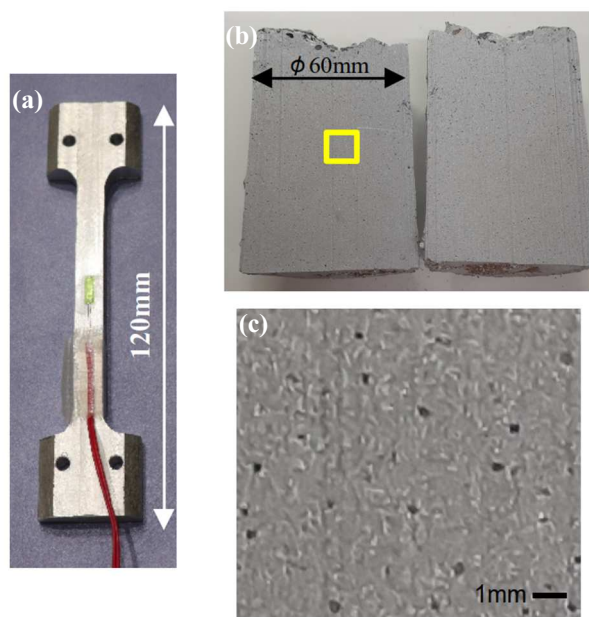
Aluminum casting samples of TNRF, (a): tensile testing sample, (b): cylindrical shape sample cut in half, (c): enlarged image of the cross sectional surface.
